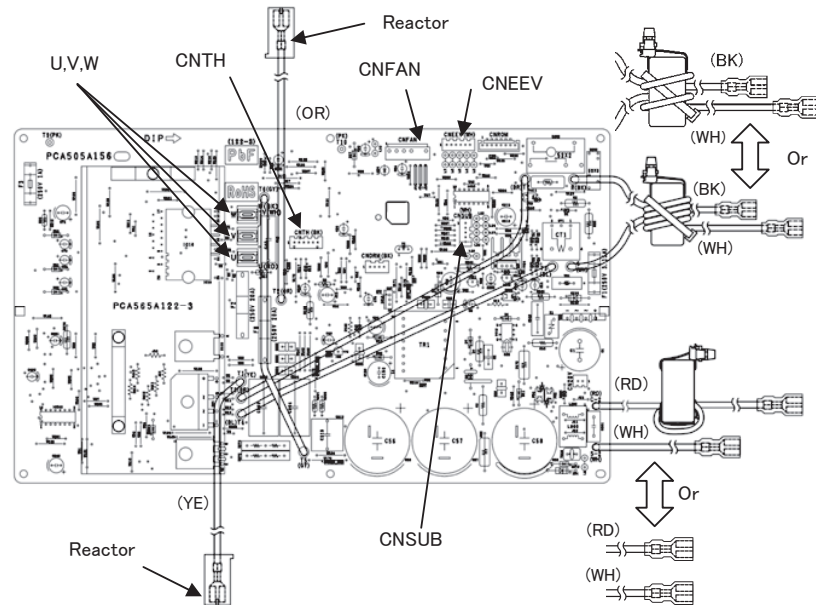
Parts arrangement view (Parts face of PCB (Main))
